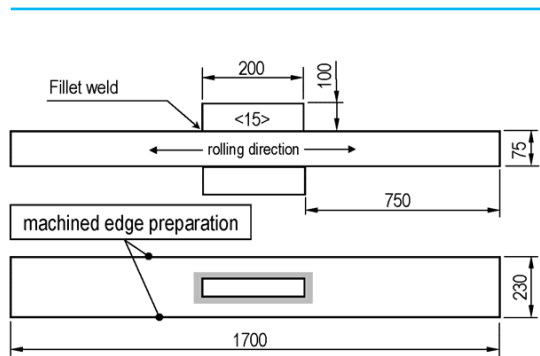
Longitudinal stiffener specimen, t = 75 mm
